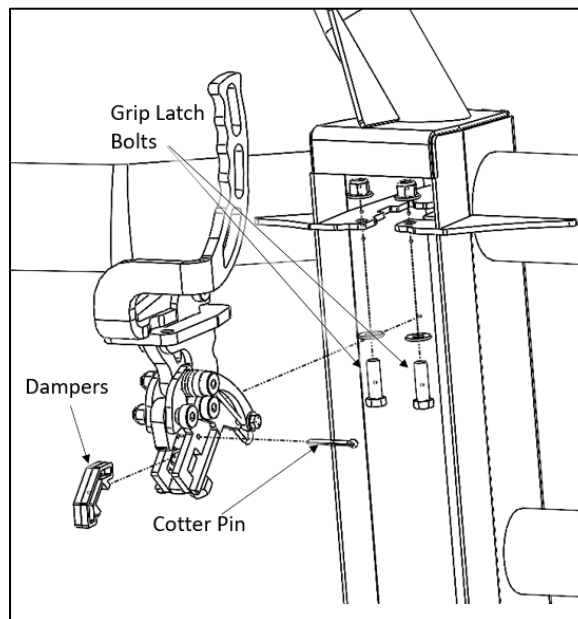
OPTIONAL Grip Latch Assembly Removal/Installation (Your Latch may not look exactly as shown)
